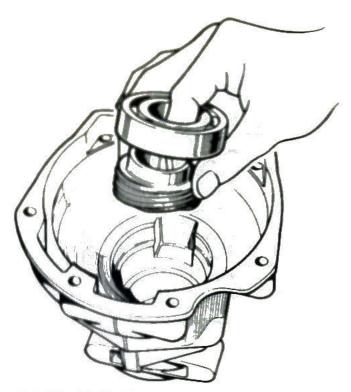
POSITIONING FRONT ANNULUS BEARING & SPEEDO DRIVING GEAR IN REAR CASING
